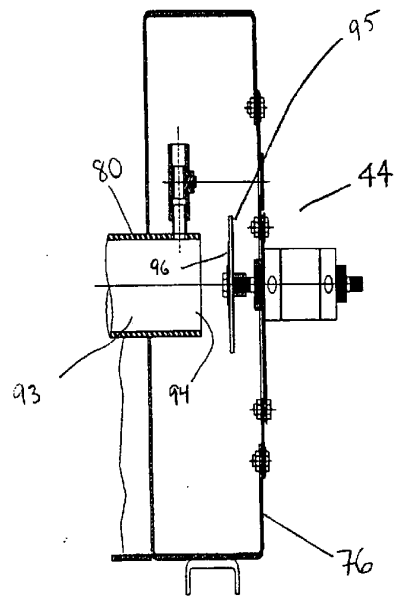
POPPET ASSEMBLY SIDE VIEW
